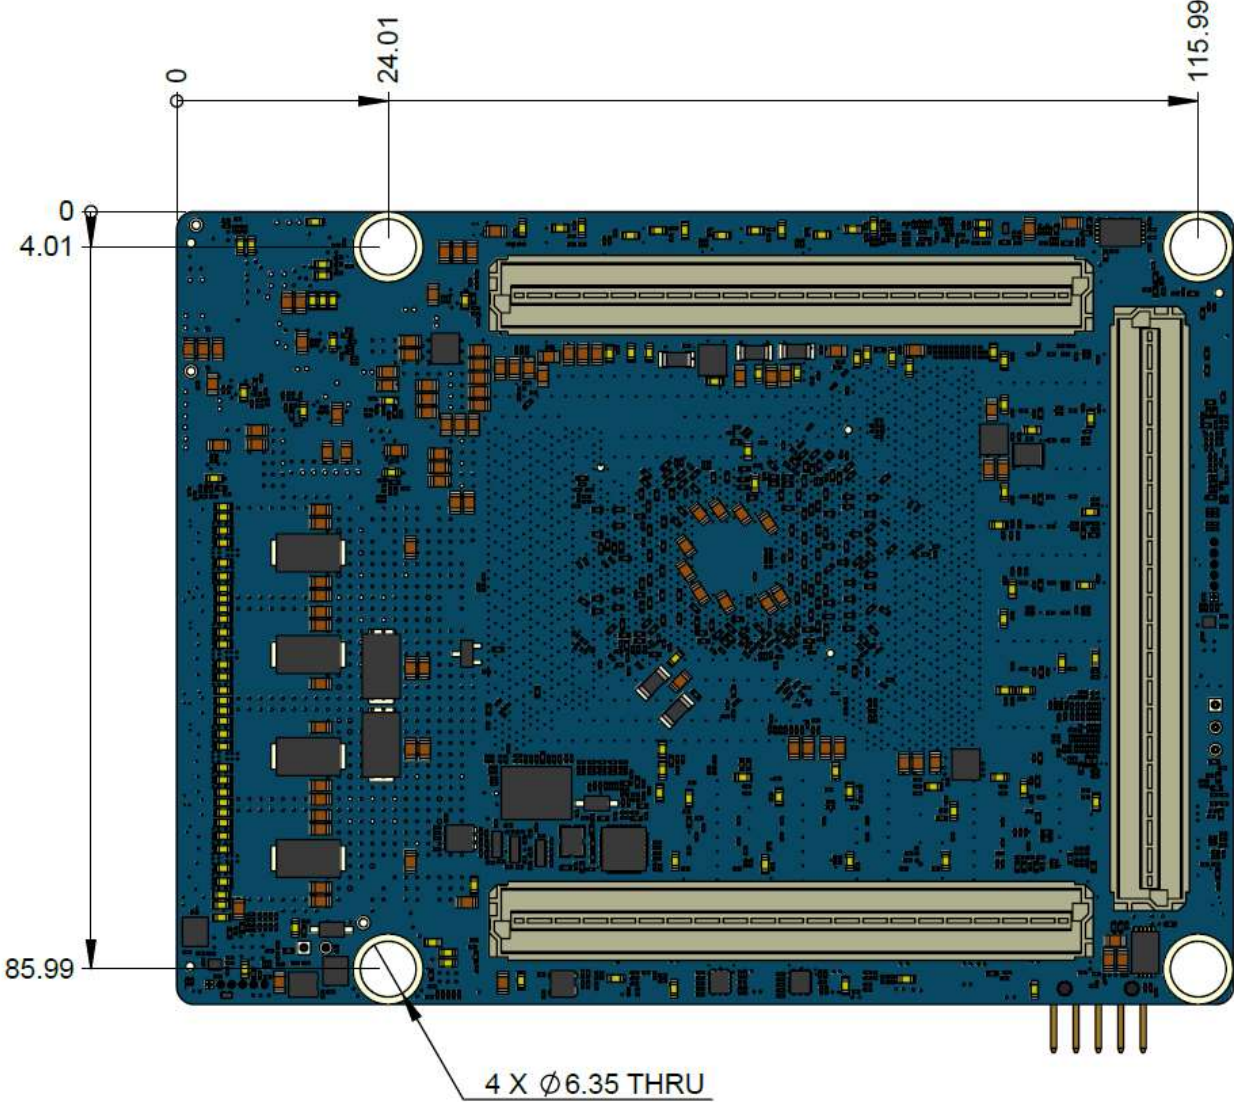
Mechanical dimension of Intel Agilex 7 SoC and FPGA SOM - Bottom View
